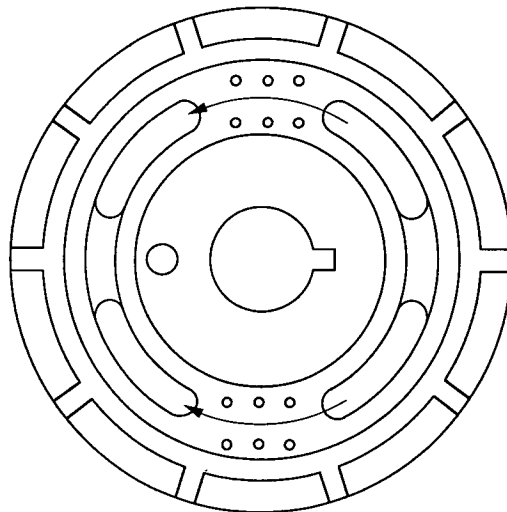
Leakage flow path across the valve plate sealing surfaces between the two motor ports.
